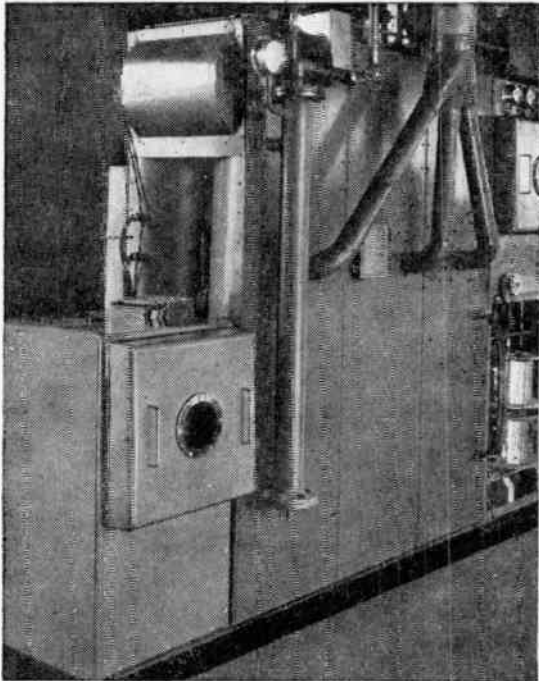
A close view of the electronically controlled grit blasting unit, incorporated in the conveyor shown in Fig. 43. The conveyor speed is about 20 in. per minute, capable of a maximum flow of 180 seven-inch panels per hour.
